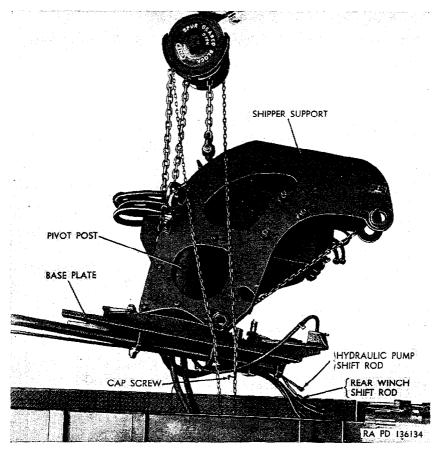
Removing base plate and pivot post assembly from crane body M62.
